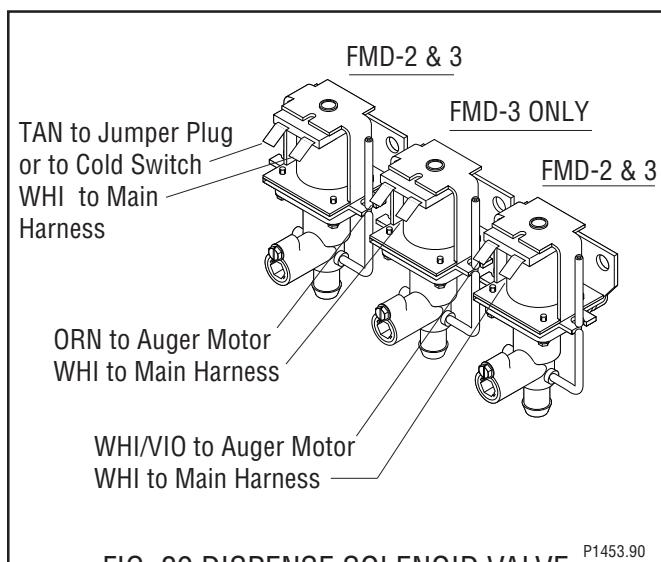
DISPENSE SOLENOID VALVE TERMINALS
